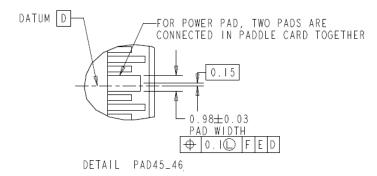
OSFP card-edge, detail of power pad (pads 45/46)
